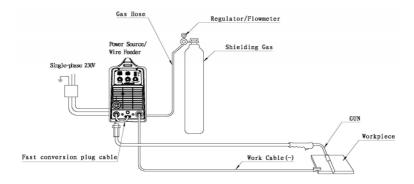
Installation - MIG/MAG wire welding with push torch
